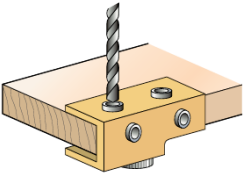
A drilling jig that has been clamped to the corner of the workpiece to get the holes in the correct place
